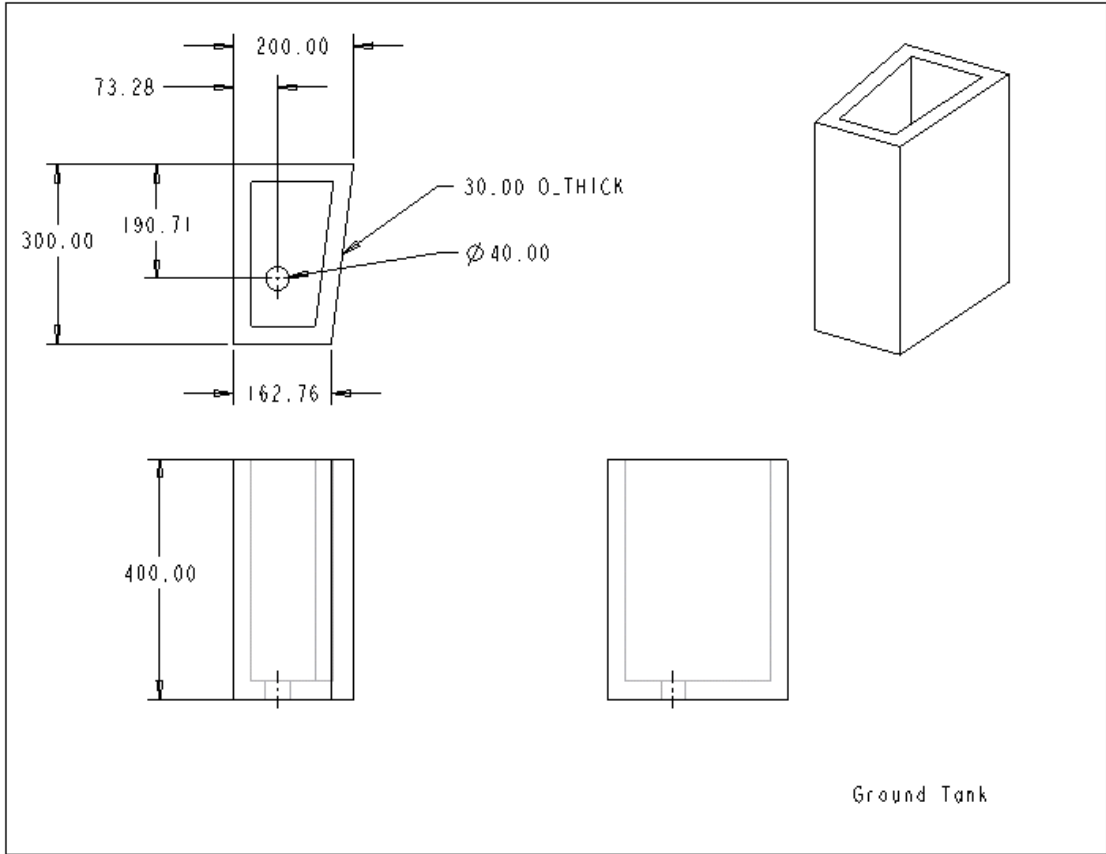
An approximate 10.75 litre custom ROCLA concrete tank (ground tank)
